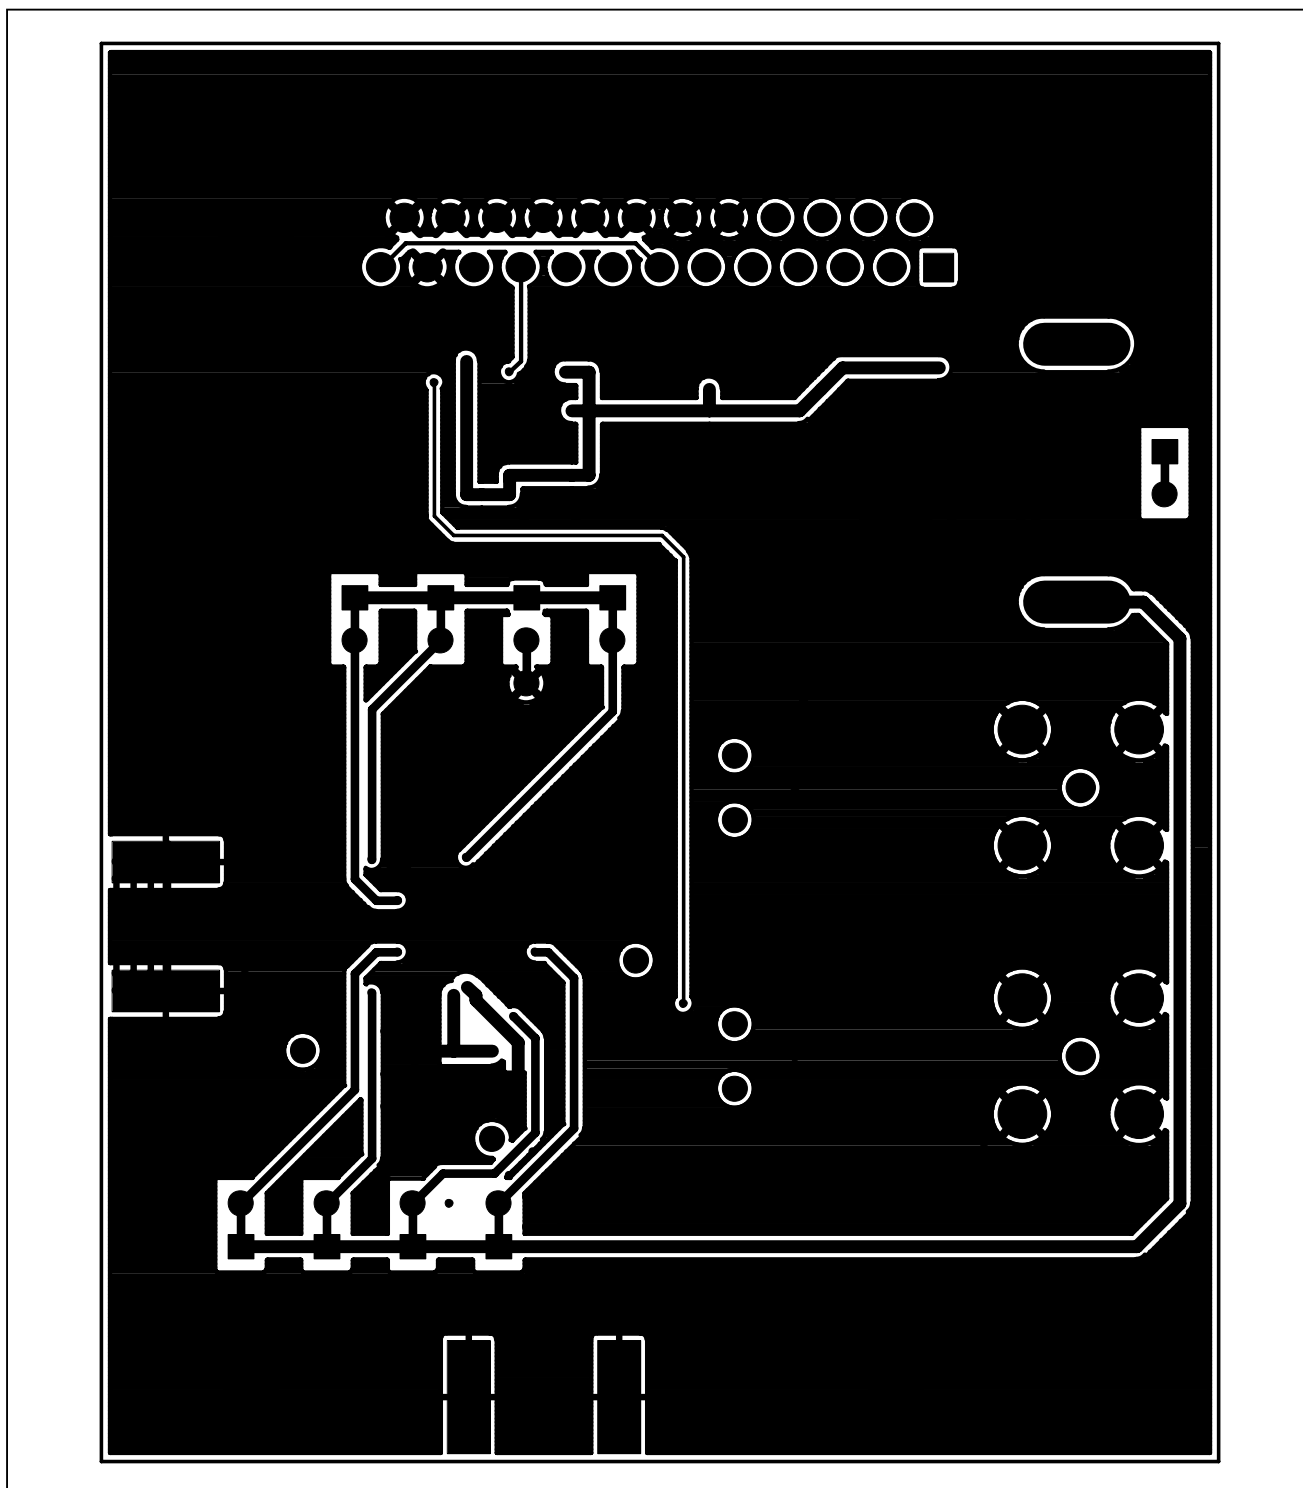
MAX2117 EV Kit PCB Layout—Bottom
